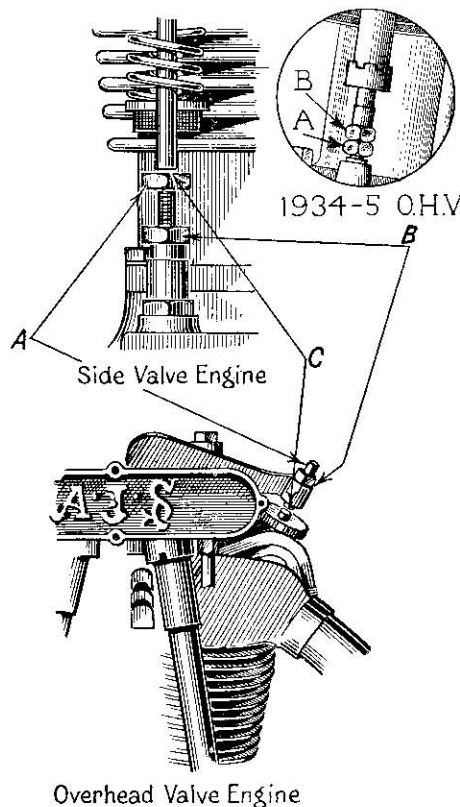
VALVE CLEARANCE ADJUSTMENT (1932-3)
